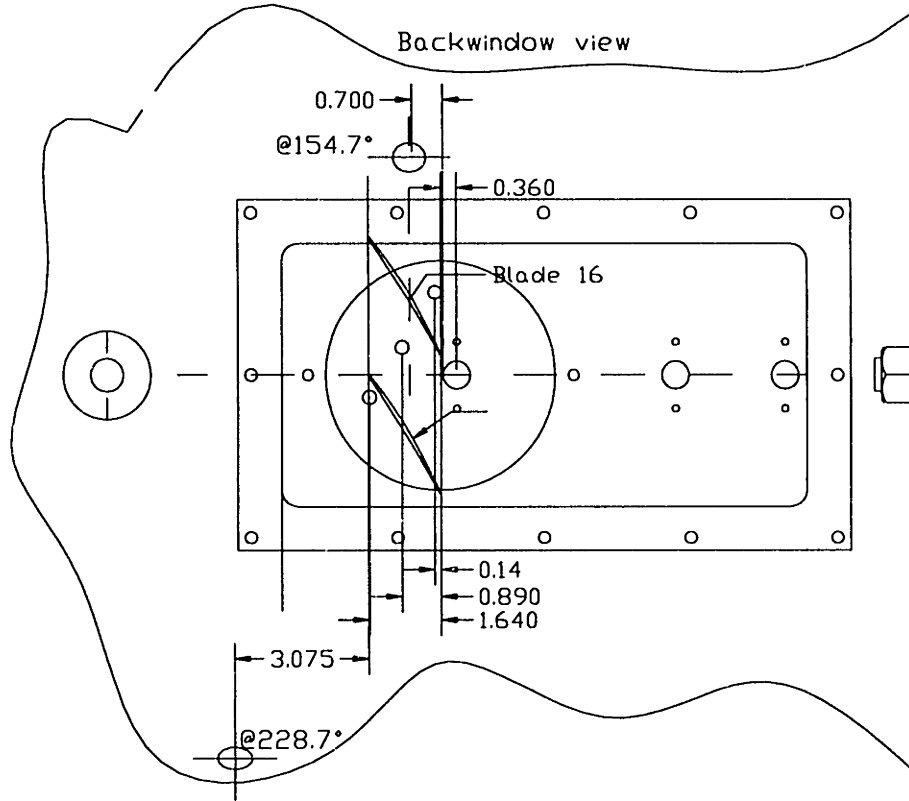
Position of wall static probes and TE/LE indicator on back side of test section
